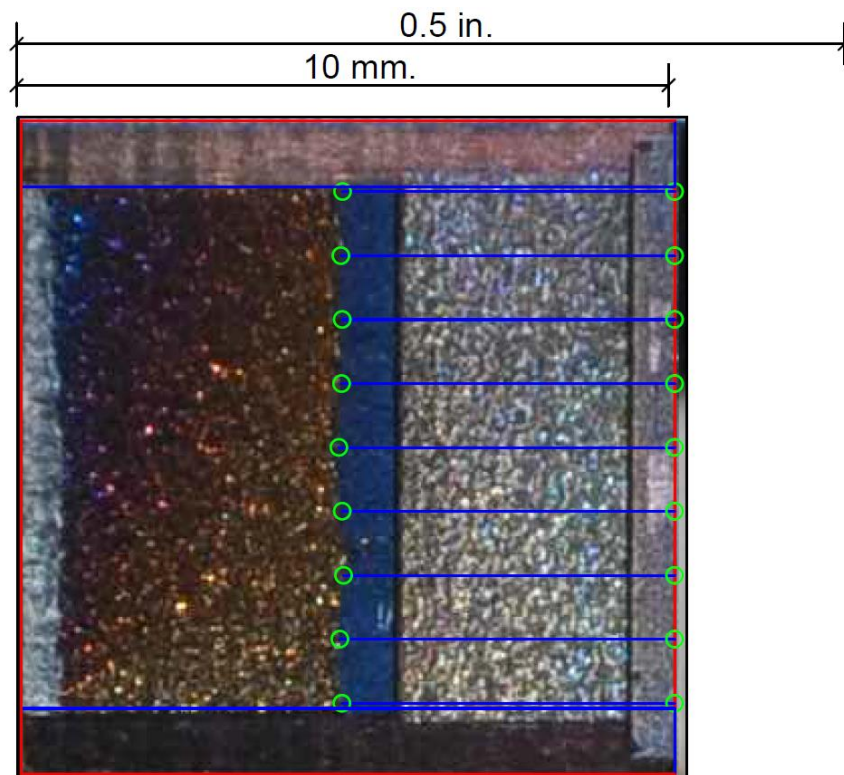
Specimen R14' Fracture Surface
